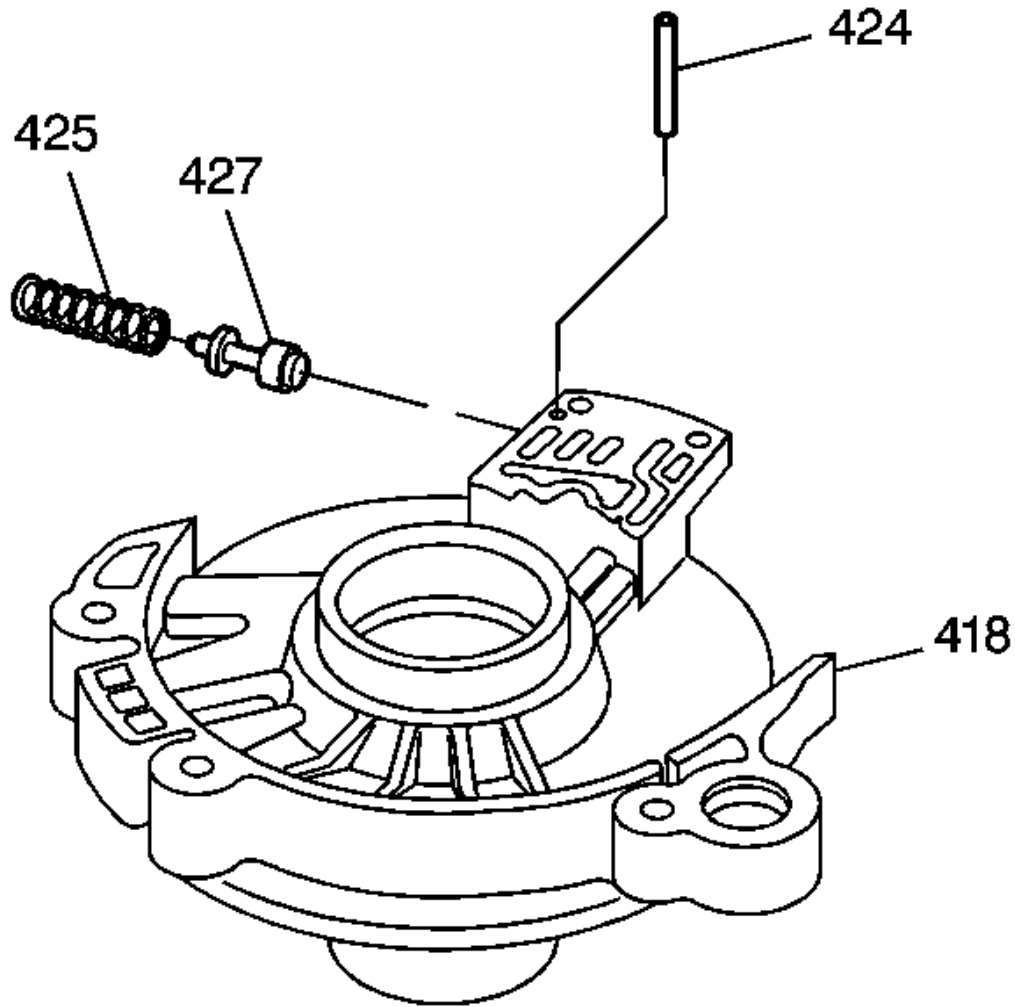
Locating Third Clutch Exhaust Valve, Spring, And Pin
